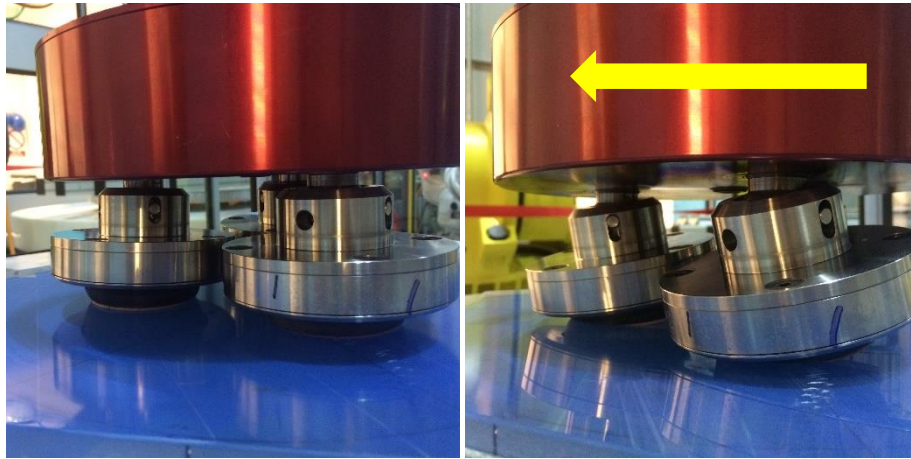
Problem of tilting during the experiment: the tool body almost touching the workpiece aspherical surface (left) and the tilt tool moving along the tool path (right).
